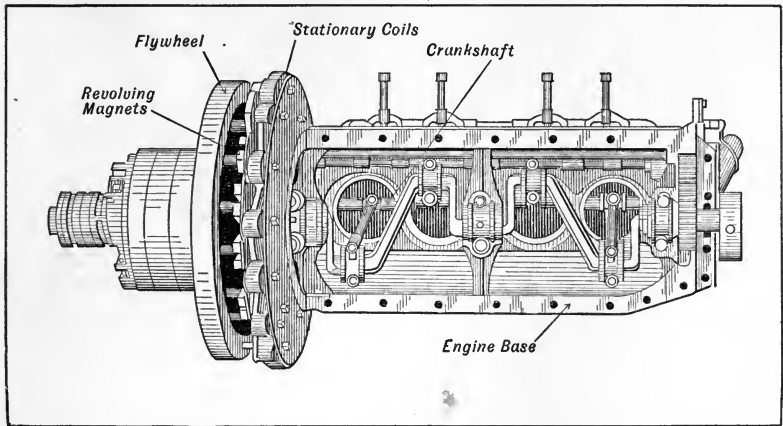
The Ford Magneto is Integral with Engine Base, and Revolving Magnets are Attached to Fly Wheel. Thus Direct Drive from Crank Shaft is Possible without Gears.
